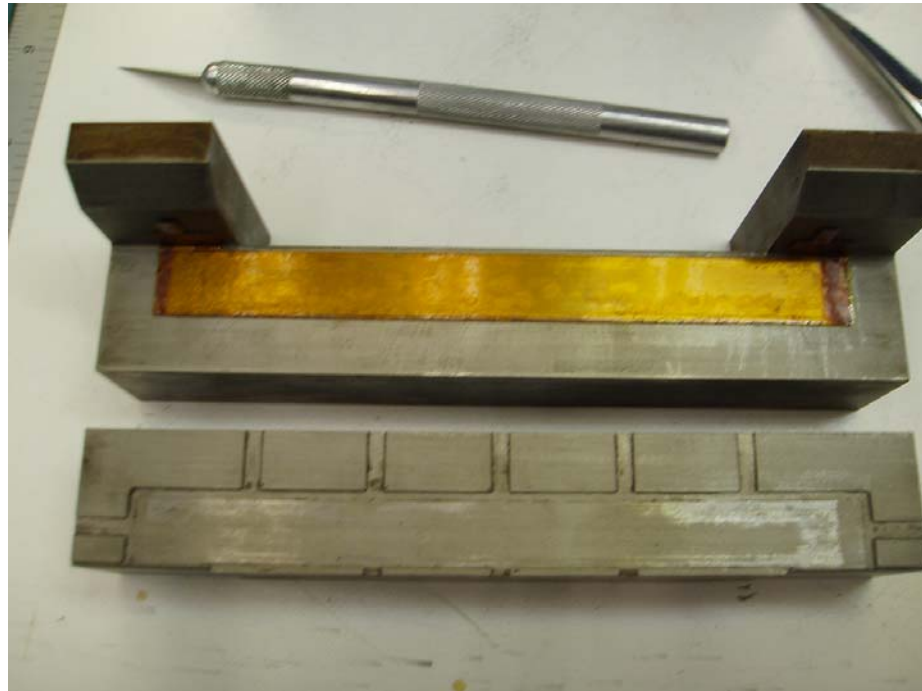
Stacking Fixture. This transducer (SG #2) has just finished its epoxy curing cycle. The surface of the fixture is sprayed with a PTFE mold release to prevent bonding between the transducer and the fixture. The grooves allow for excess epoxy to seep out as needed.
